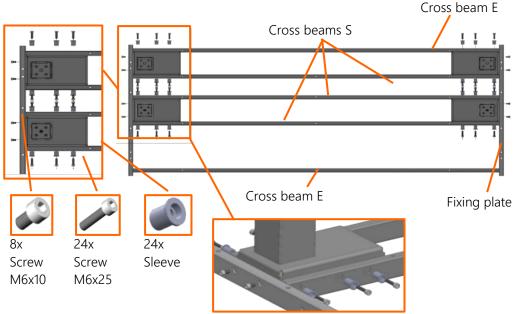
Assembly of lifting elements of the 4-leg system with top frame
